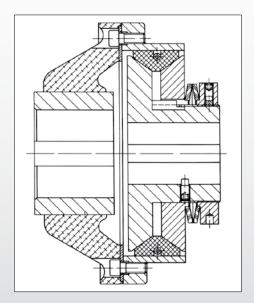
Conax® Slipping Clutch type CR -F combined with highly flexible coupling
